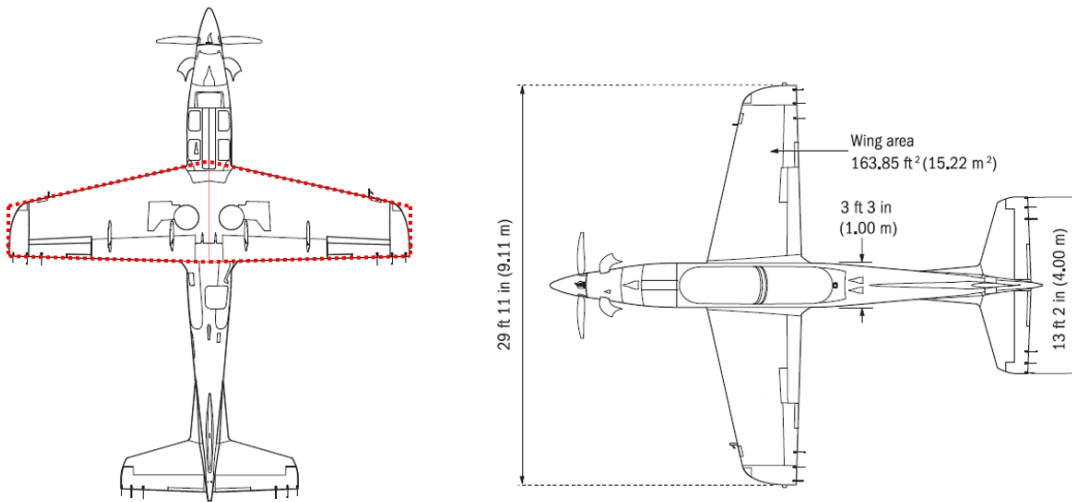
PC-21 Bottom and Top View Drawings [16]
